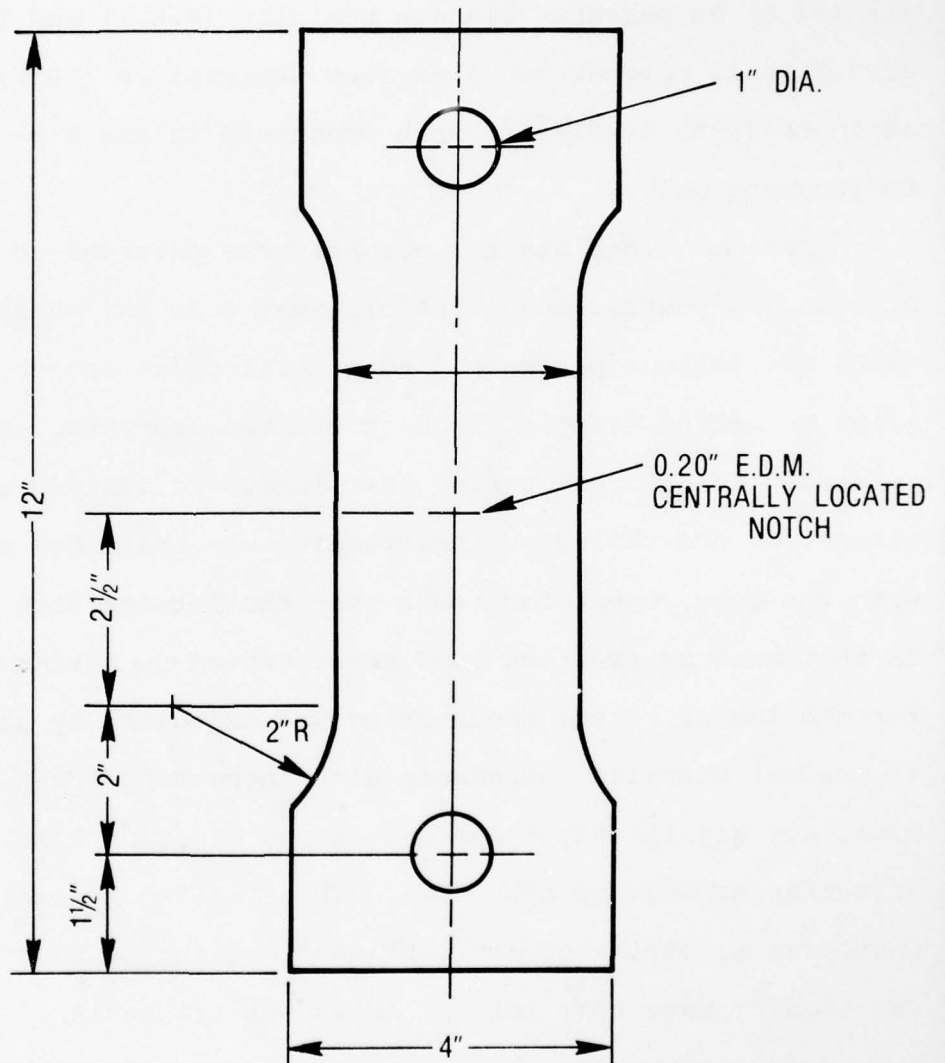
Center Crack Tension Fatigue Crack Propagation Specimen
